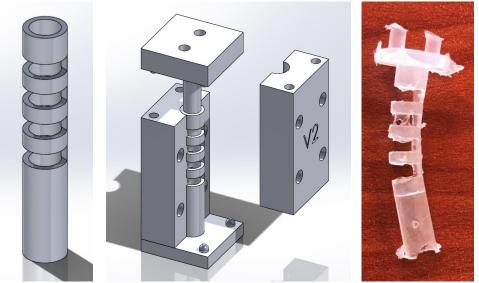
Steerable Tip Insert Development Iteration 1 (Left), 3D Printed Mould (Centre), Cast Part (Right)
